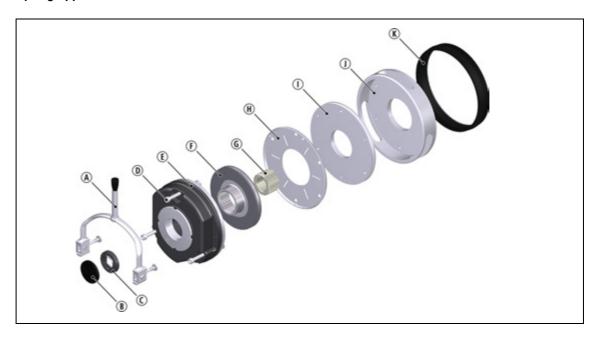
Spring-applied brake INTORQ BFK458-06 to 25
